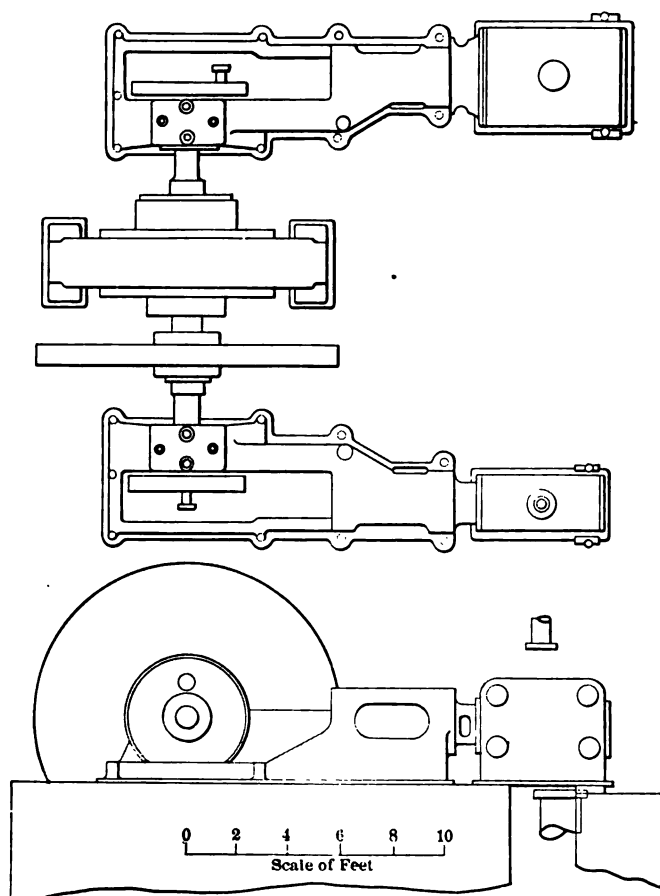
Plan and Elevation of 500 Kw. Corliss Engine.
